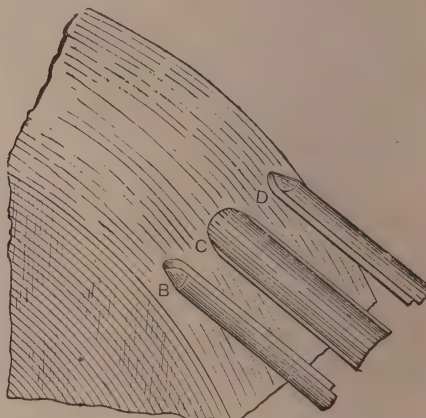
A.—Grinding a Gouge ; B, C and D indicate Rotary Movement of Tool
